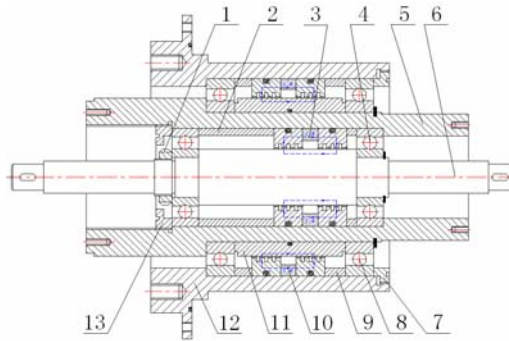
The final structure of coaxial twin-shaft magnetic fluid rotary seals: 1- Nut; 2- Inner sleeve; 3- Magnetic fluid rotary seals of inner shaft; 4- Bearing of inner shaft; 5- Magnetism isolating outer shaft; 6- Inner shaft; 7- Outer end cover; 8- Bearing of outer shaft; 9- Outer sleeve; 10- Magnetic fluid rotary seals of outer shaft; 11- Magnetic conductive sleeve of outer shaft; 12- Magnetism isolating housing; 13- Inner end cover.
